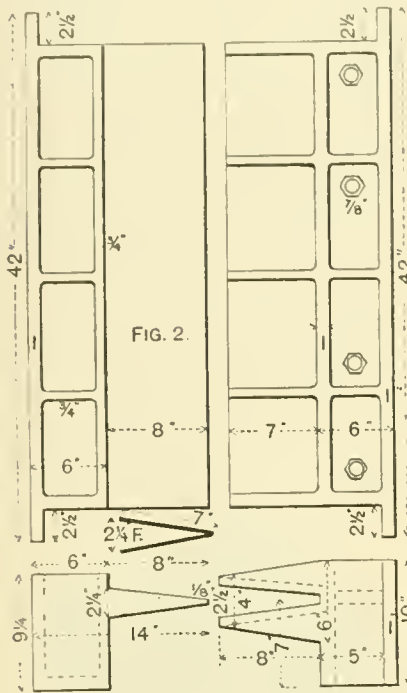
is a pair of dies for bending the protective sheathing used on the edges of gang planks. This sheathing, as made here, is of No. 14 steel, 36 inches long, and 14 inches wide; it is V shaped when finished. When this forming was done by hand in the boiler shop, the cost was 50 cents for each piece; the present cost is one cent per piece. The bending is done cold and in one movement of the dies, leaving a smooth, true job that cannot be equalled by hand work.
